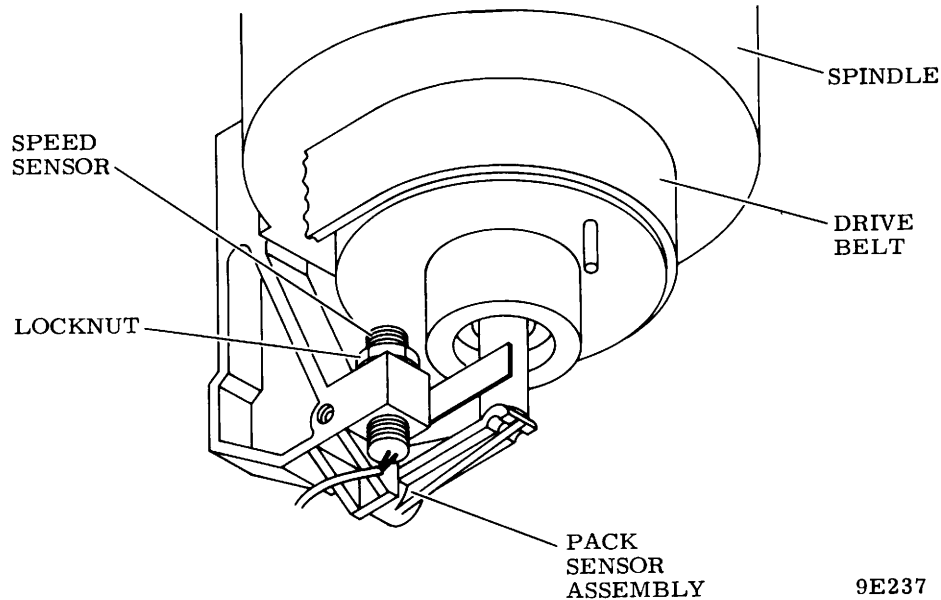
Speed Sensor Assembly Replacement (S/C 09 and Above)
